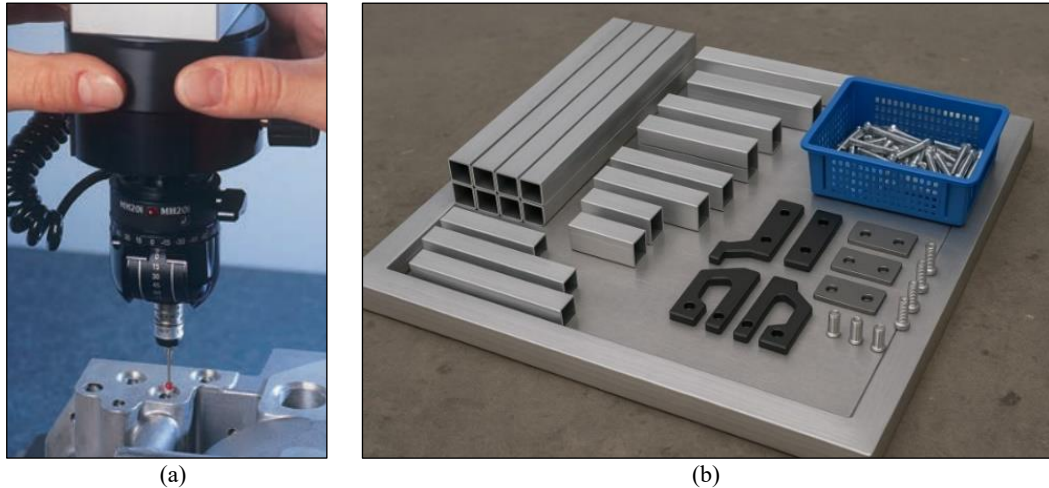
(a) Dimension checking and (b) kitting process for components.
